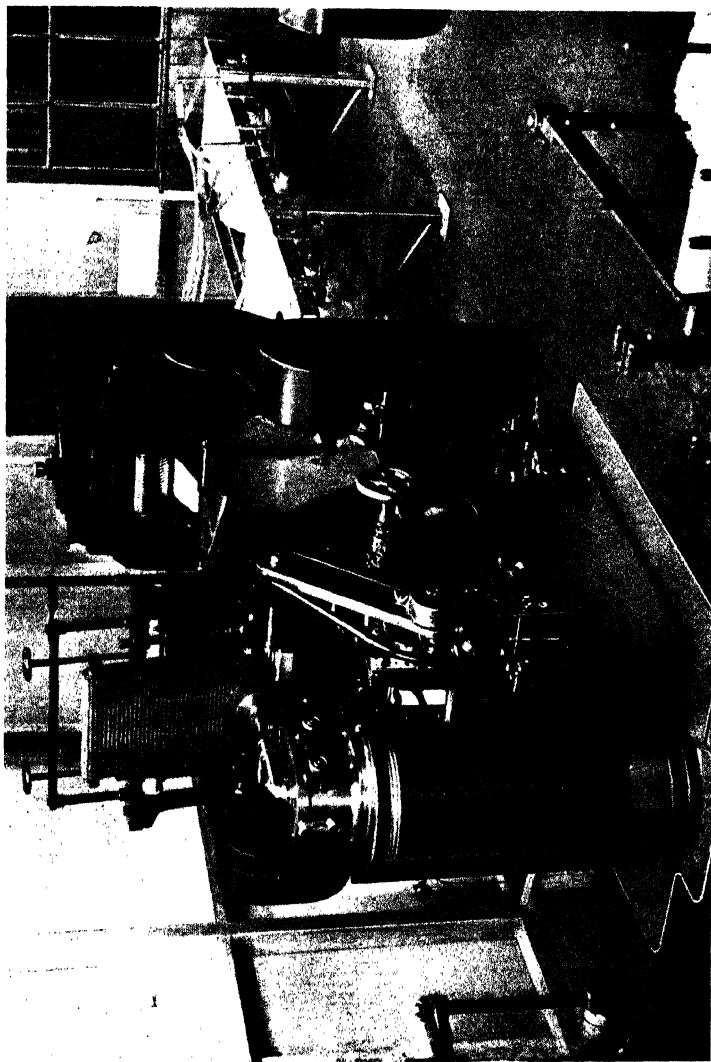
STAPLE CUTTING OF TOW WITH BRADFORD OPEN-DRAWING INTERSECTING GILL BOX
